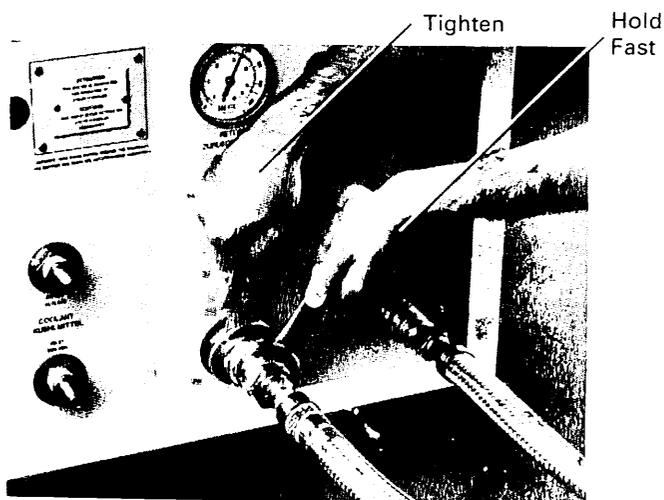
PROPER CONNECTION OF AEROQUIP COUPLINGS
